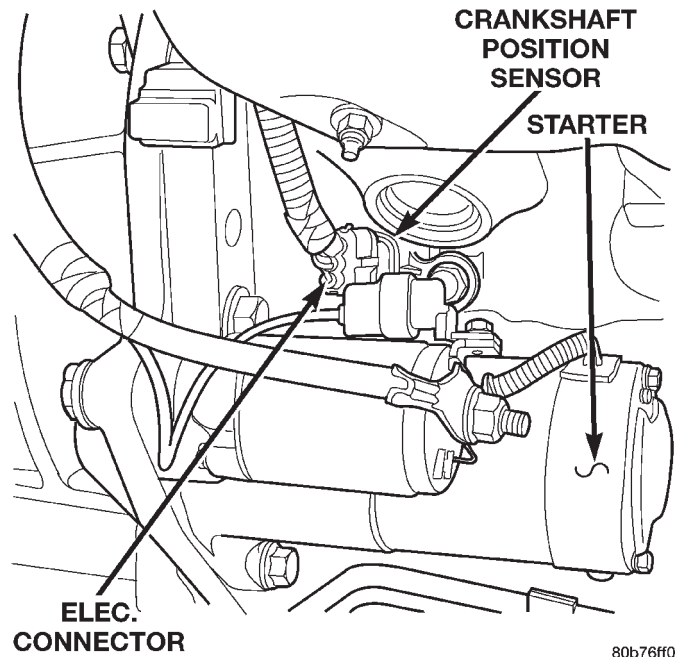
CKP Sensor Location—4.7L V-8 Engine
